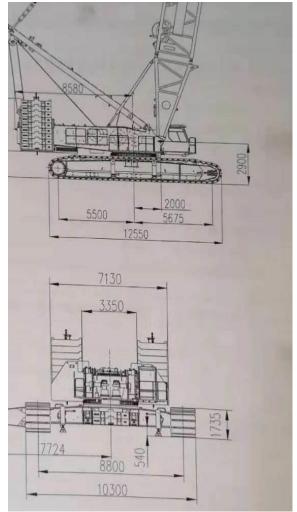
Geometric dimension data of side steel structure of the crawler crane
